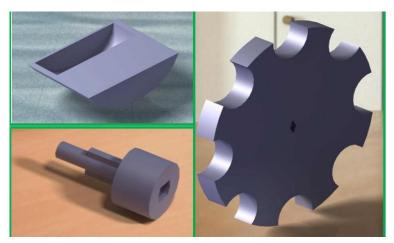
Bearing clamp layout (top left), driveshaft layout (bottom left), and gear type tire layout.
